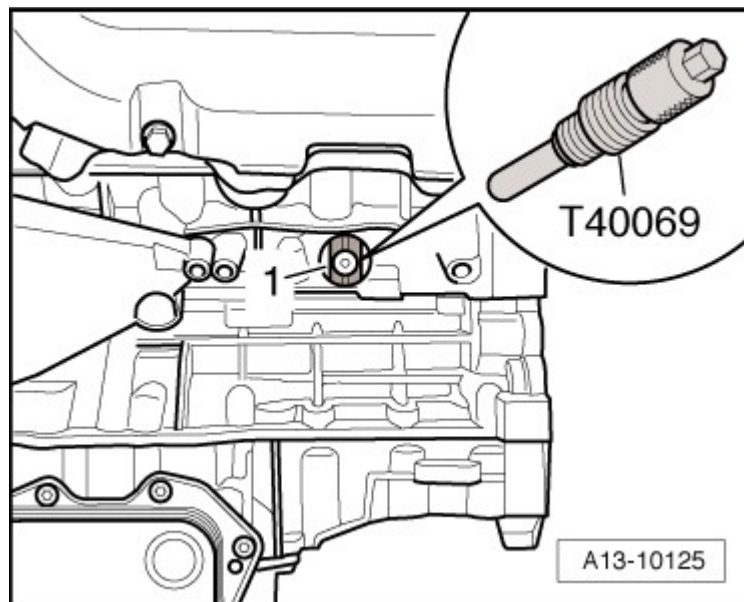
Identifying Crankshaft Holder T40069 In Hole, Removal/Installation
